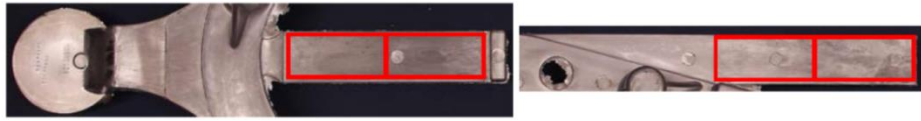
Position of specimens for bending testing in the appendixes of the casting.
